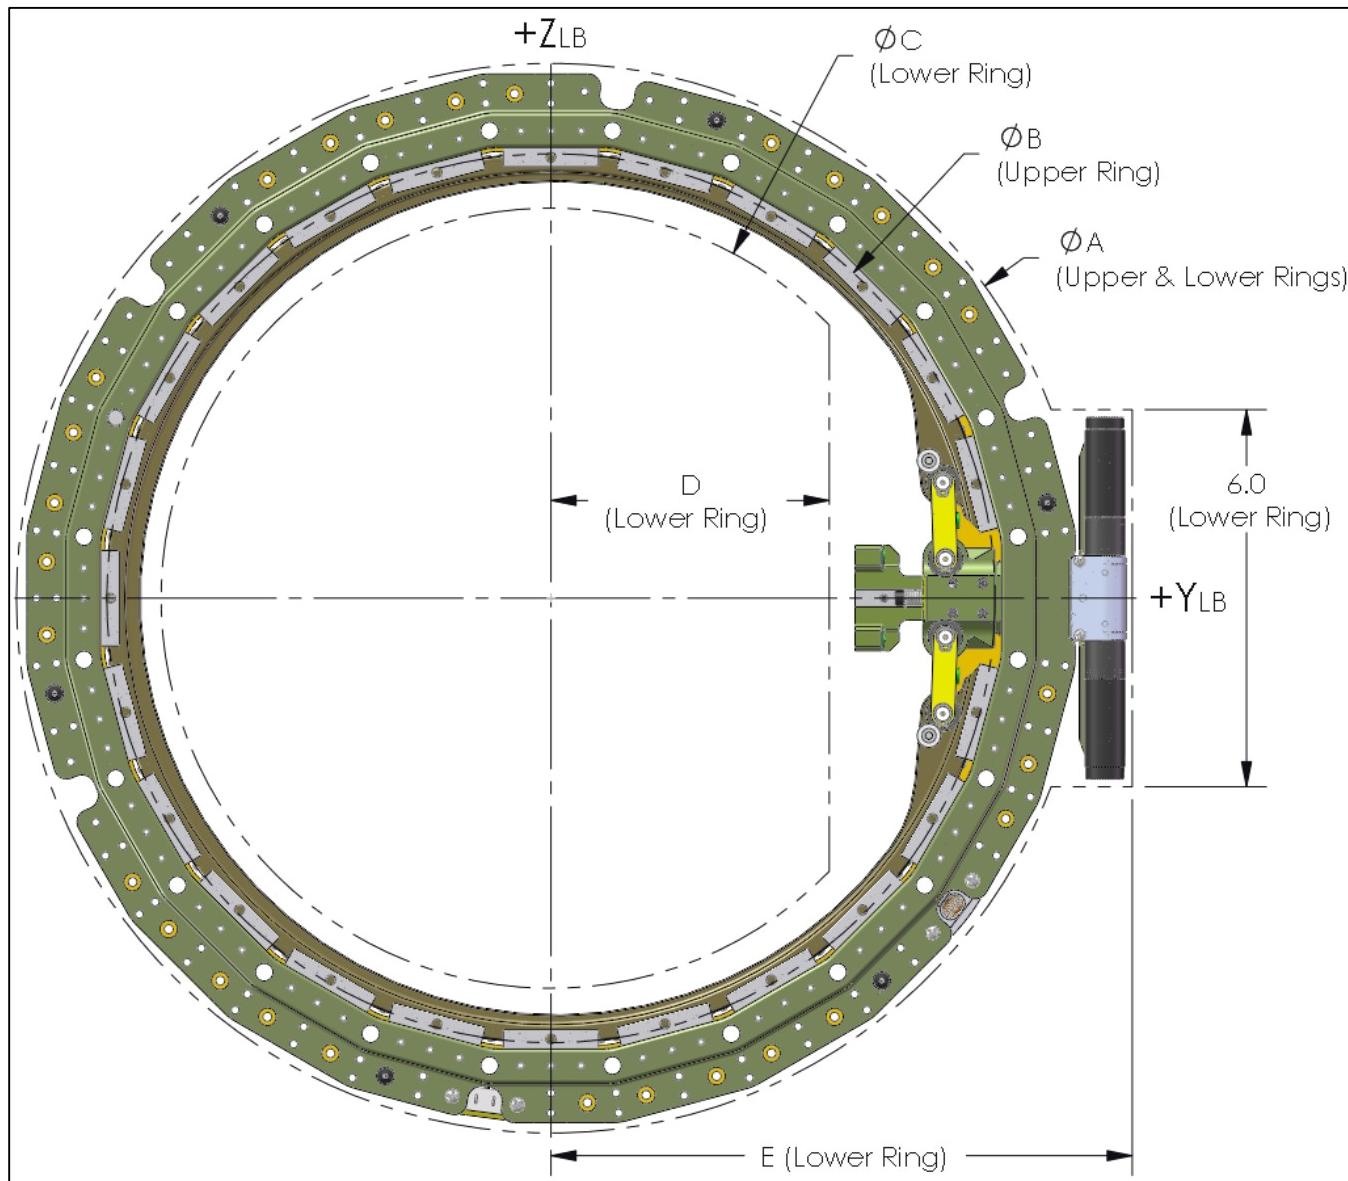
Top view of Lightband, see Table 5-1 for variable dimension values
